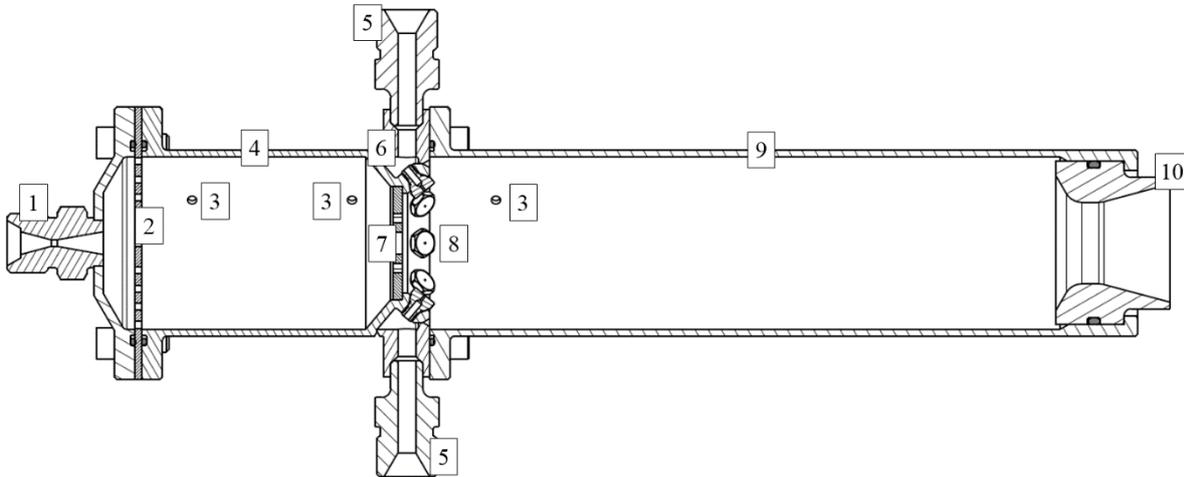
Engine cross section: 1-cavitating venturi, 2-HTP distributor, 3-measurement ports, 4-catalytic chamber, 5-fuel ports, 6-fuel collector, 7-HTP injector plate, 8-fuel injectors, 9-combustion chamber, 10-nozzle
